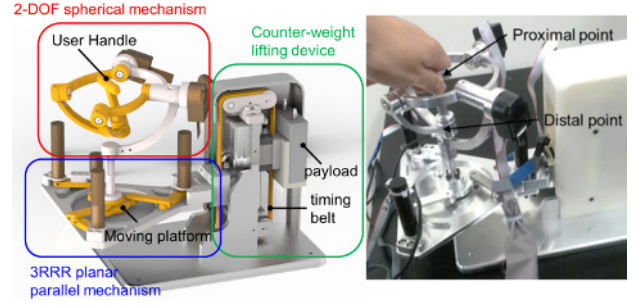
Mechanical design (left) and prototype (right) of the master manipulator.
